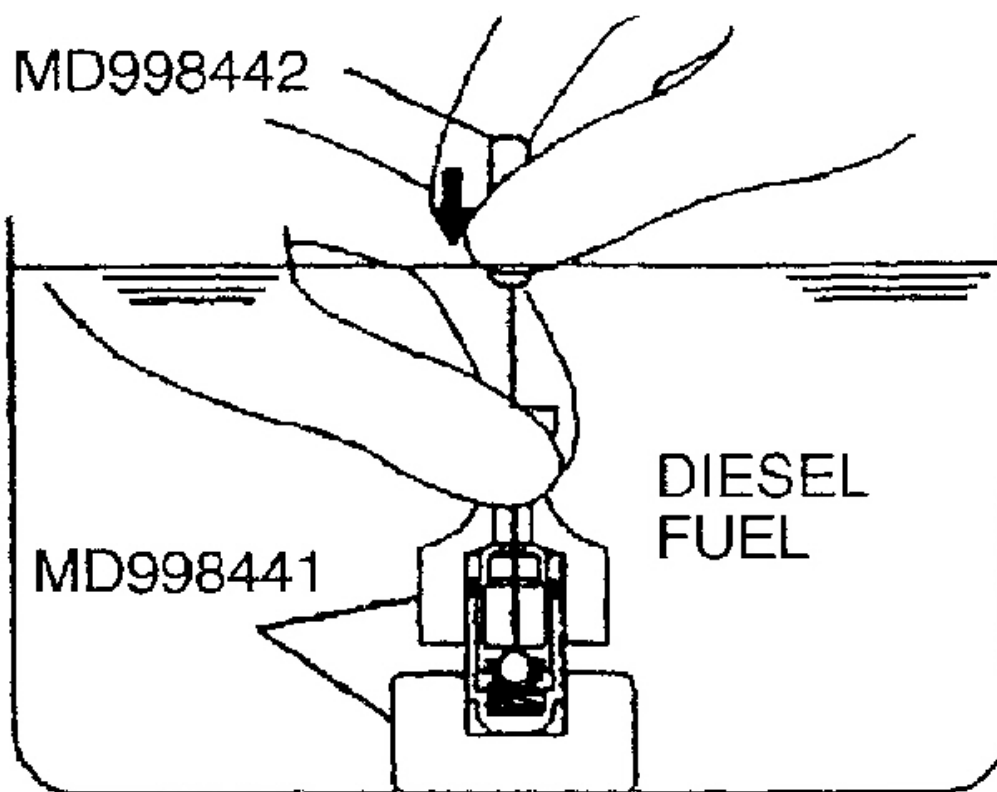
Removing Diesel Fuel From Pressure Chamber
